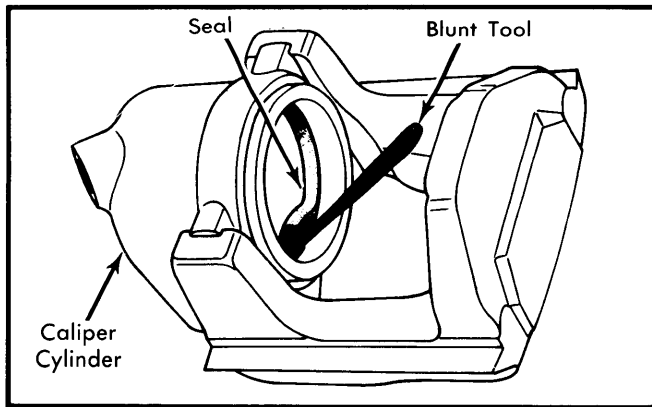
Prying Out Seal from Caliper Cylinder Bore
